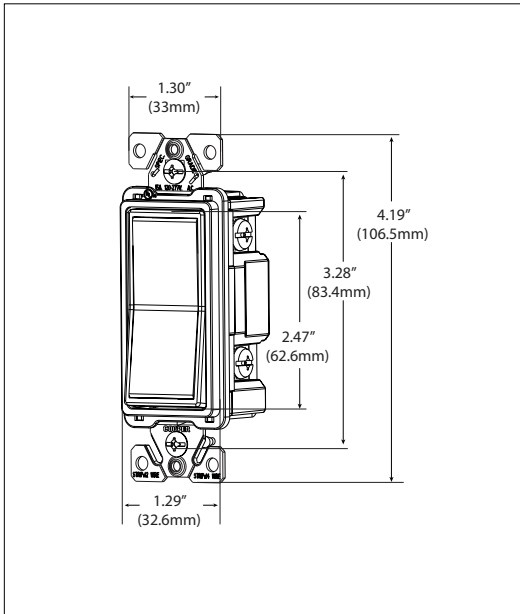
7621, 7622, 7623, 7624 Line art with dimensions
